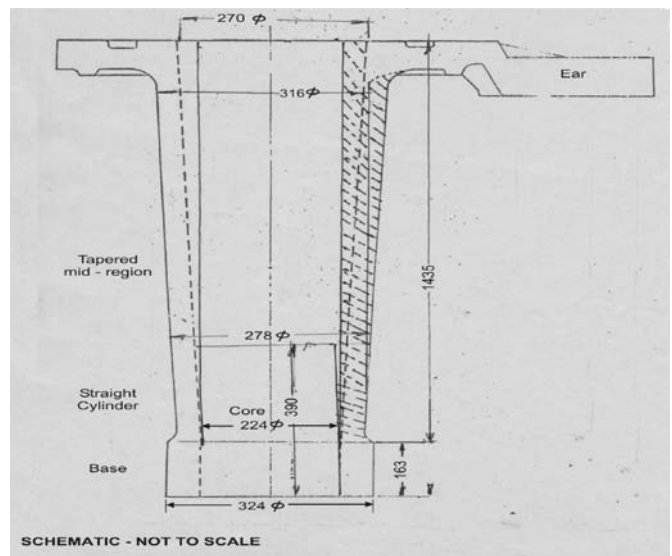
Critical Dimensions of the Hollow Shaft Casting
